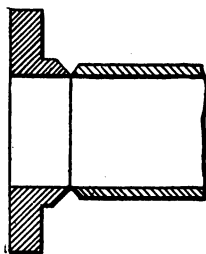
Pipe and flange bevelled preparatory to welding.
